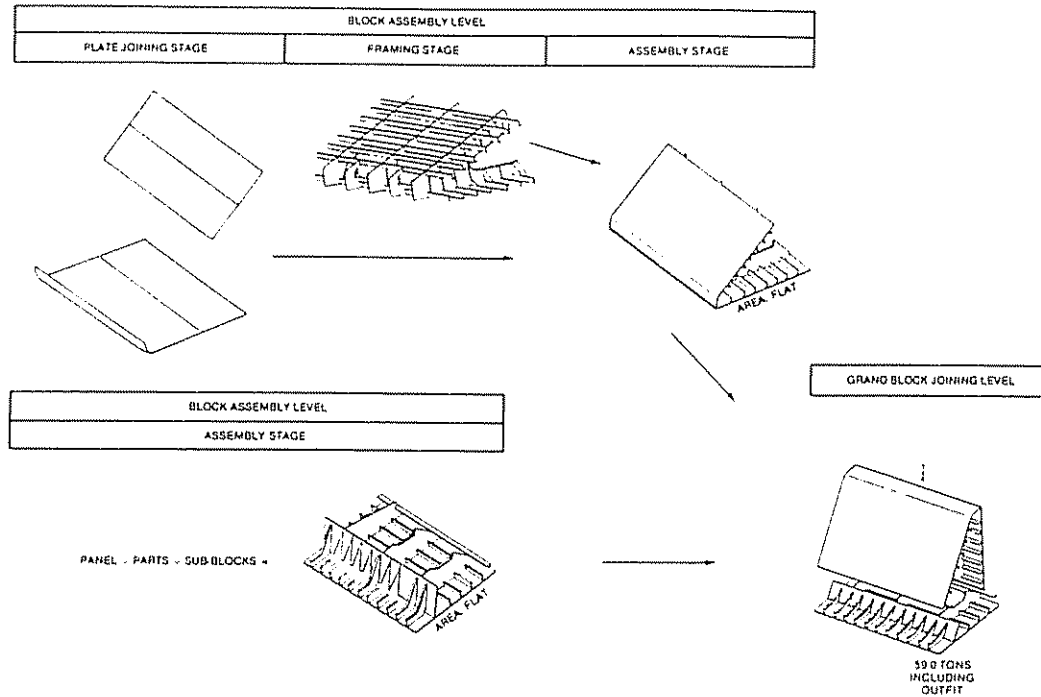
Block assembly and grand-block joining, showing the top of a wing tank
